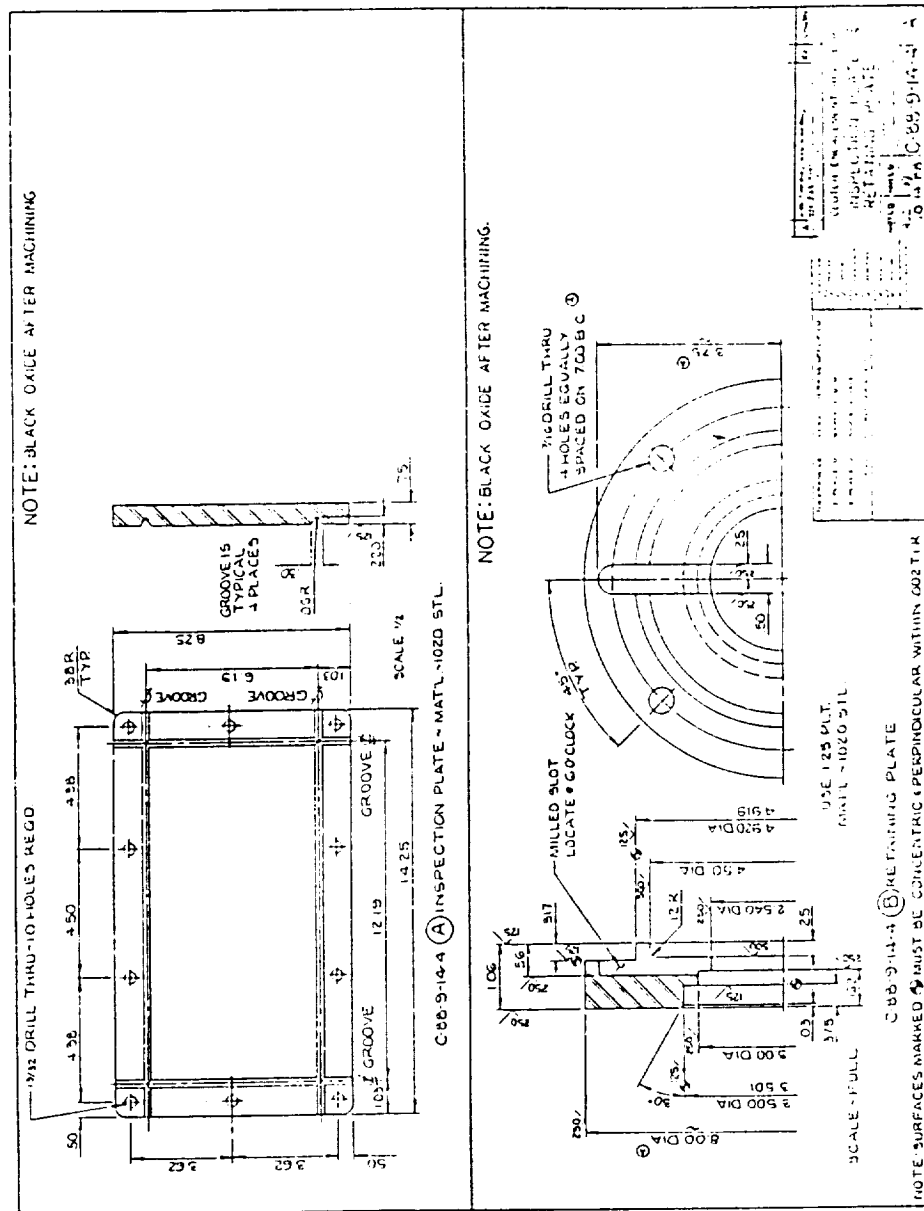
Drawing C-88-9-14-4. Test rig inspection plate and outer bearing retaining plate.
